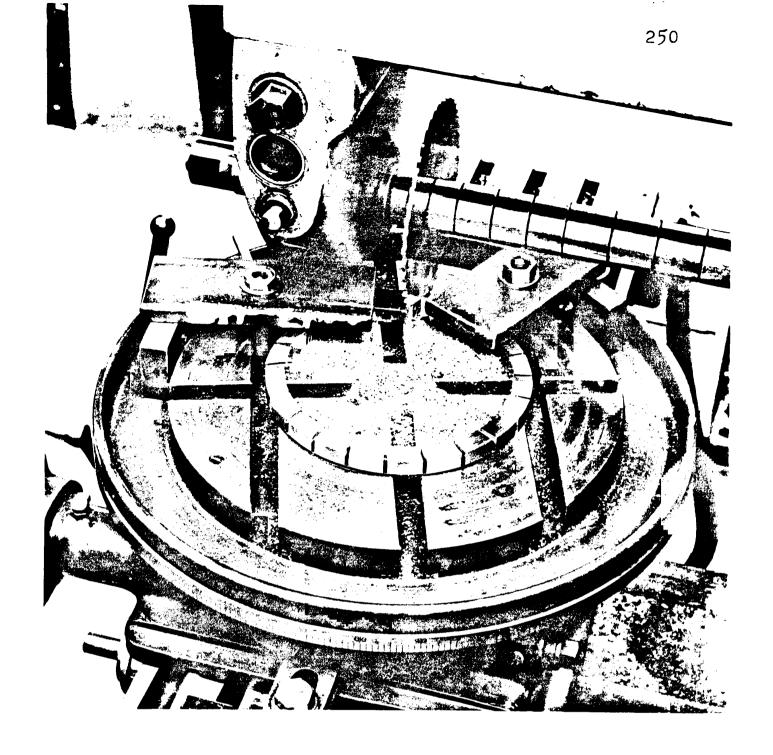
A stage in producing mild steel spacers for use in the composite grinding wheel
